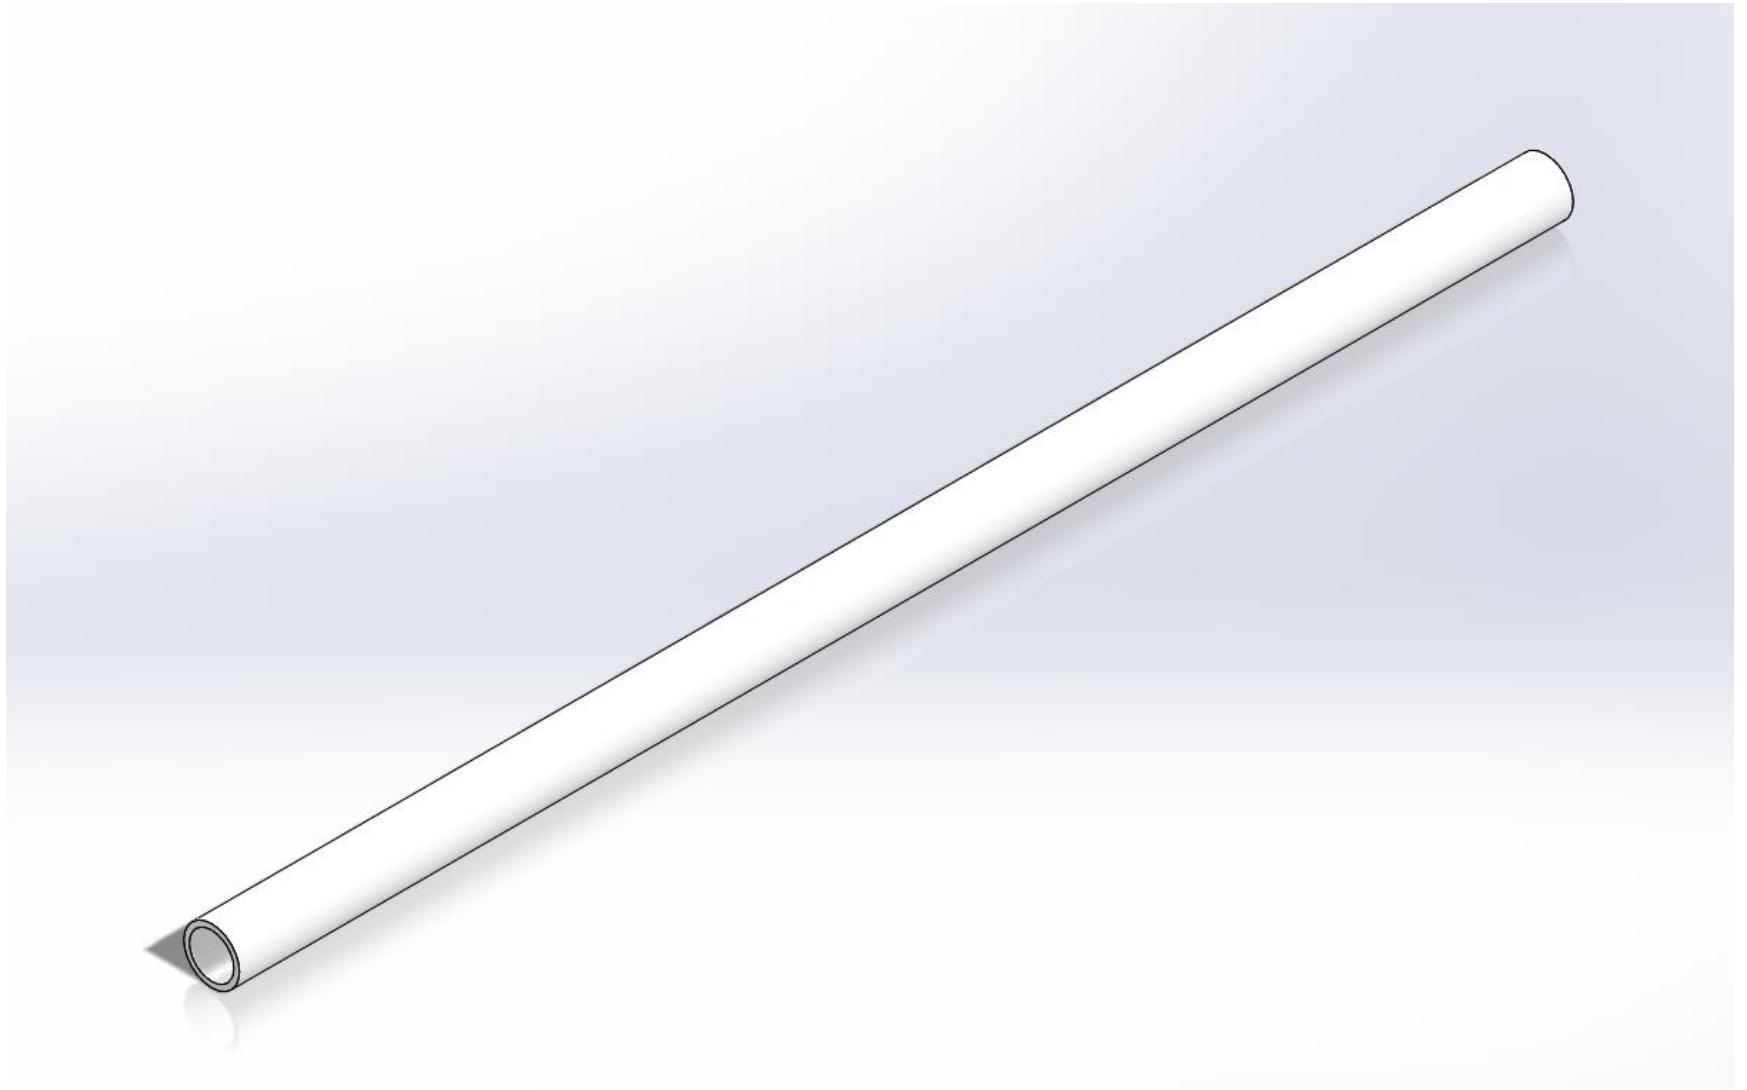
Part 1015 (Crack-Resist Polypropylene Semi-Clear Tubing) CAD Drawing
